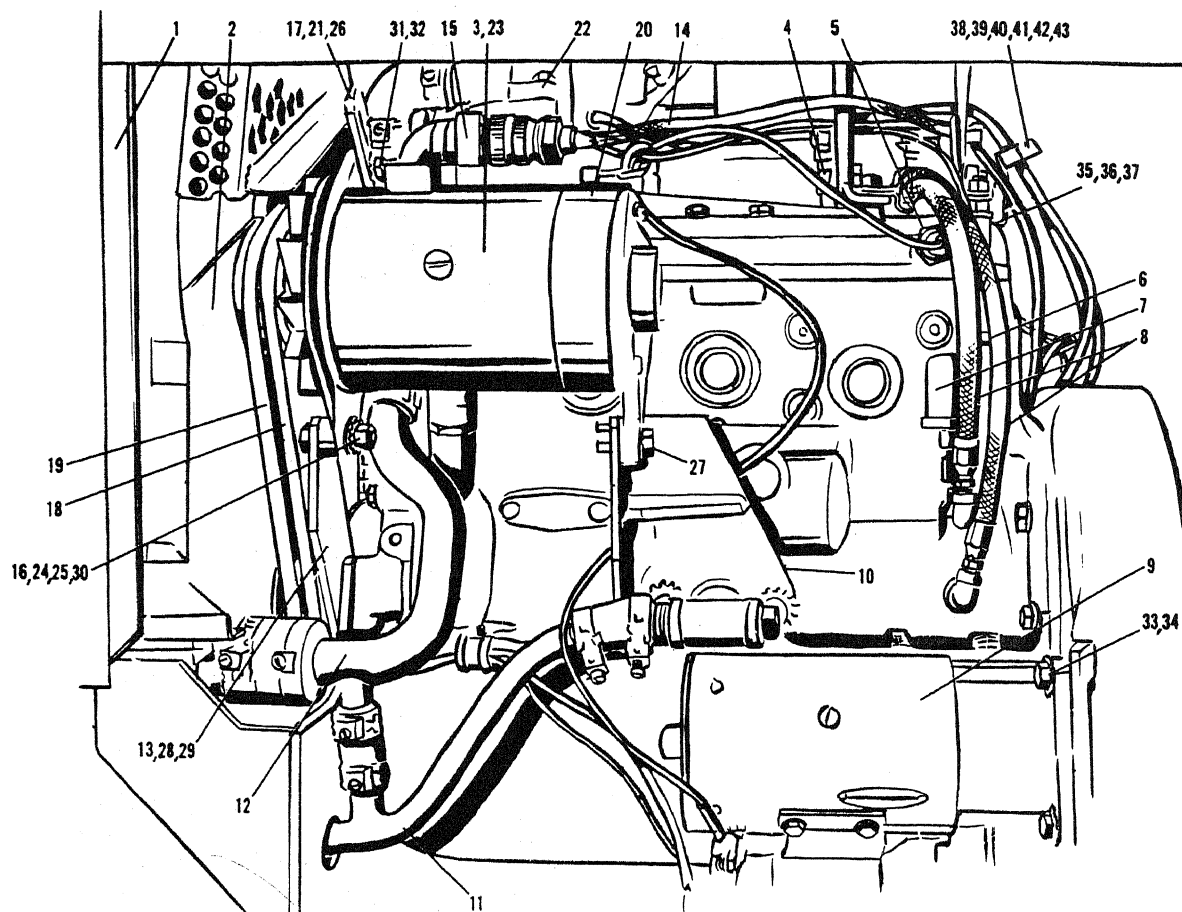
ENGINE COMPONENTS, MANIFOLD SIDE
